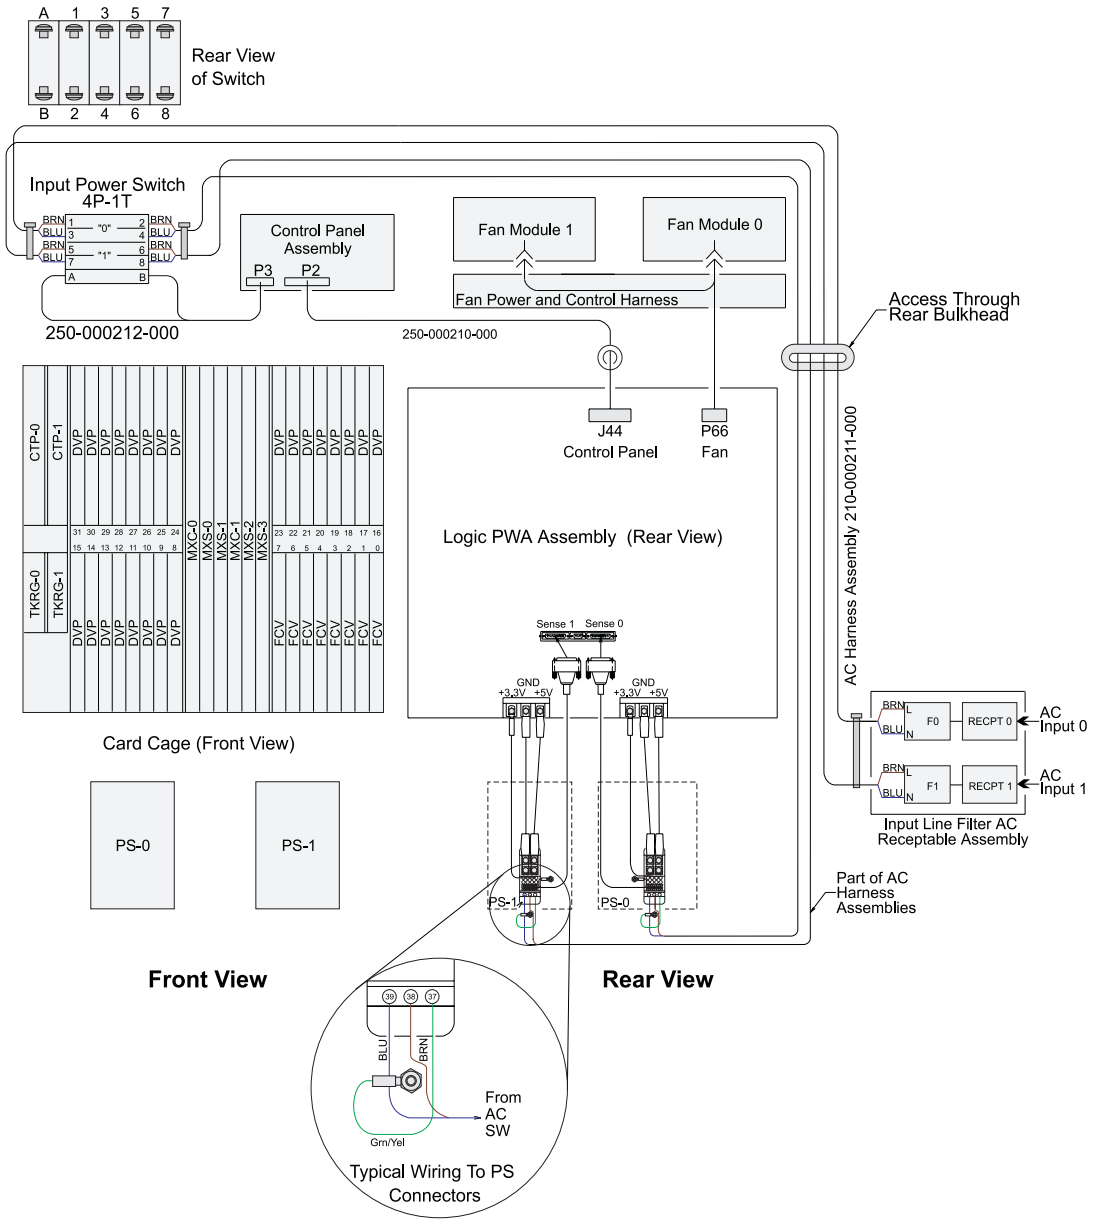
Director Electrical Cabling, Connections, and Ground Connections
